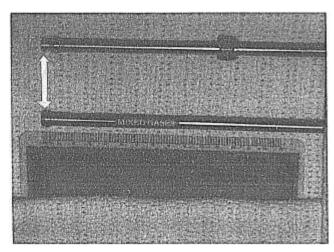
A properly crimped common gas line is positioned above a improperly crimped line. An arrow points to the crimp. Note that the sleeve in the improperly crimped line is crimped on the very end of the tube and can be pulled off with finger pressure.
